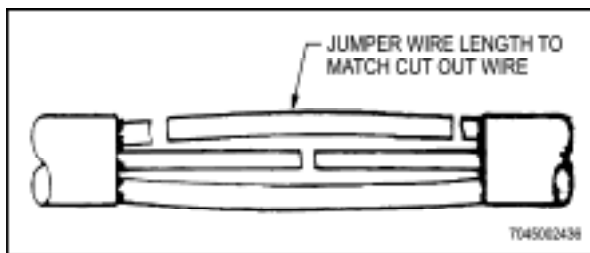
Jumper Wire Cut to Match Removed Segment
